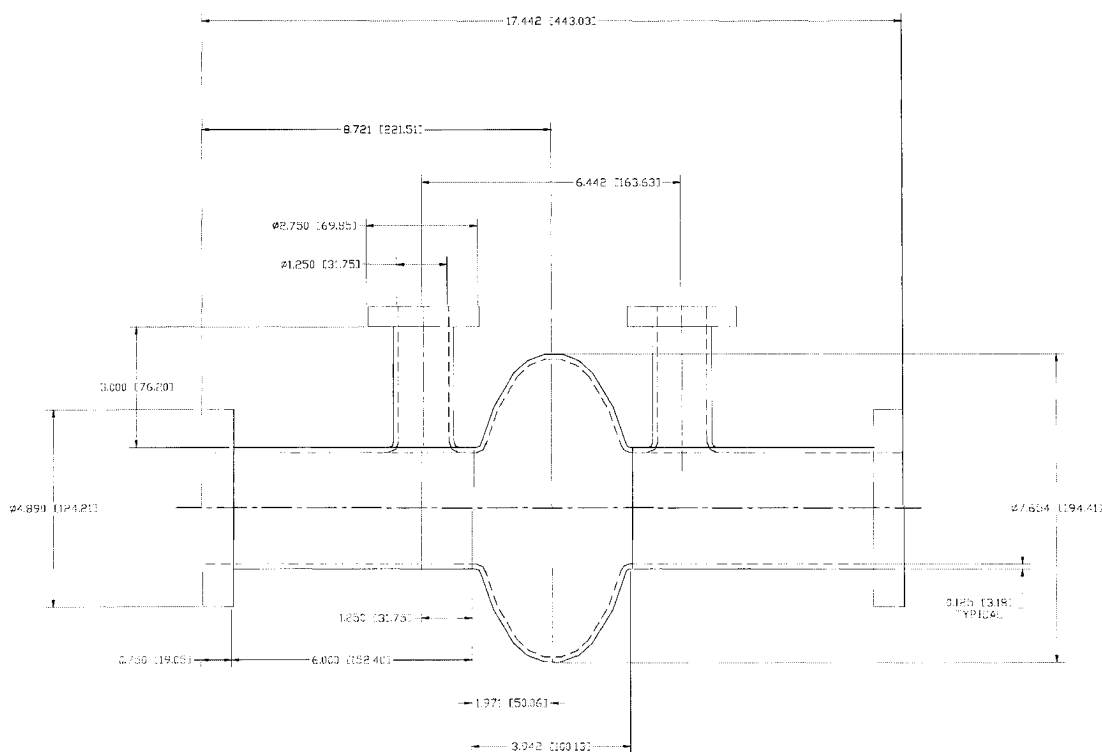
Sketch of the single cell cavity used for the $\text{TE}_{011}/\text{TM}_{010}$ measurements. Dimensions are in inches [millimeters].
